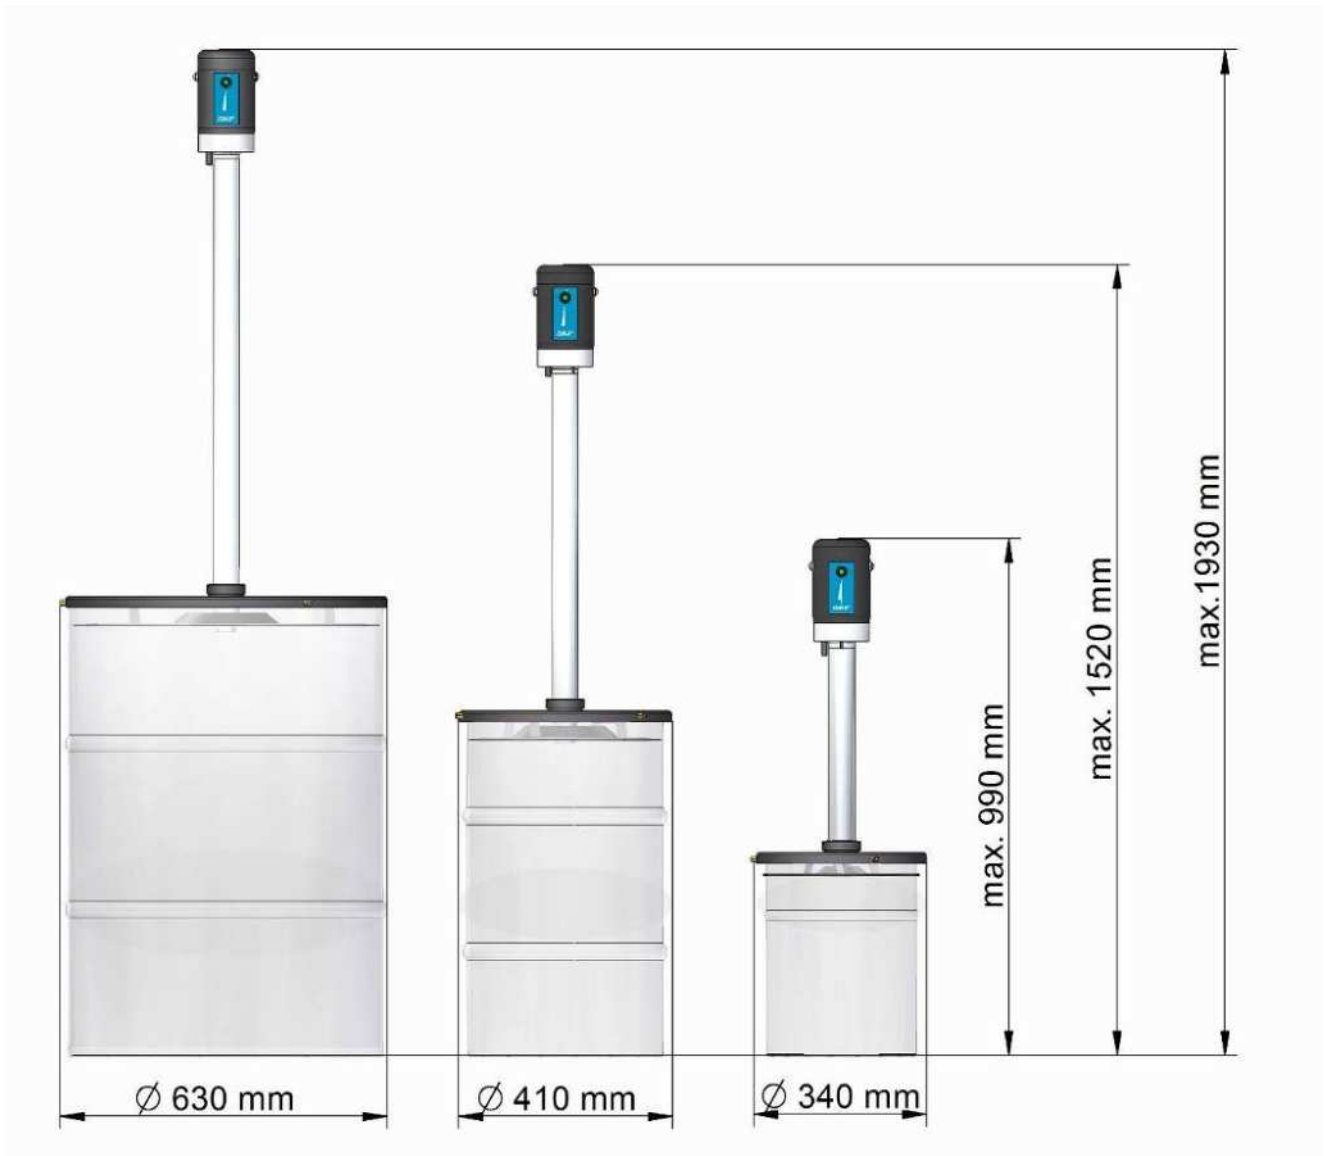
Dimensions, pump with barrel (1/1, 1/4, 1/8)
